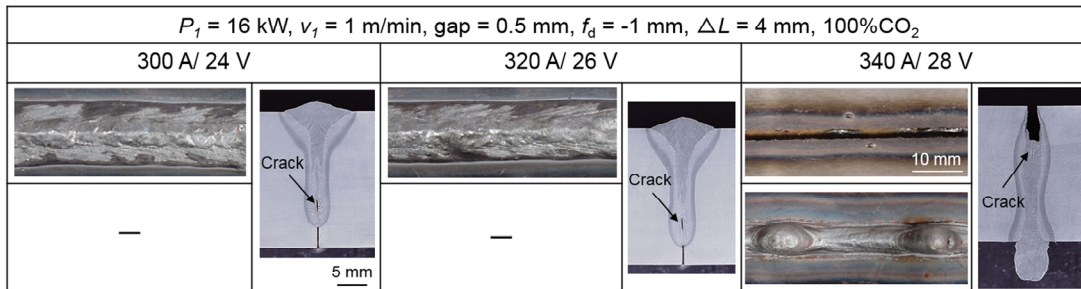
Surface appearances and cross sections of weld beads produced by laser-CO₂ arc hybrid welding at various welding currents.
